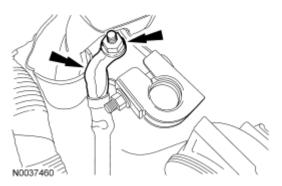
Locating Battery Cable And Nut Courtesy of FORD MOTOR CO.
